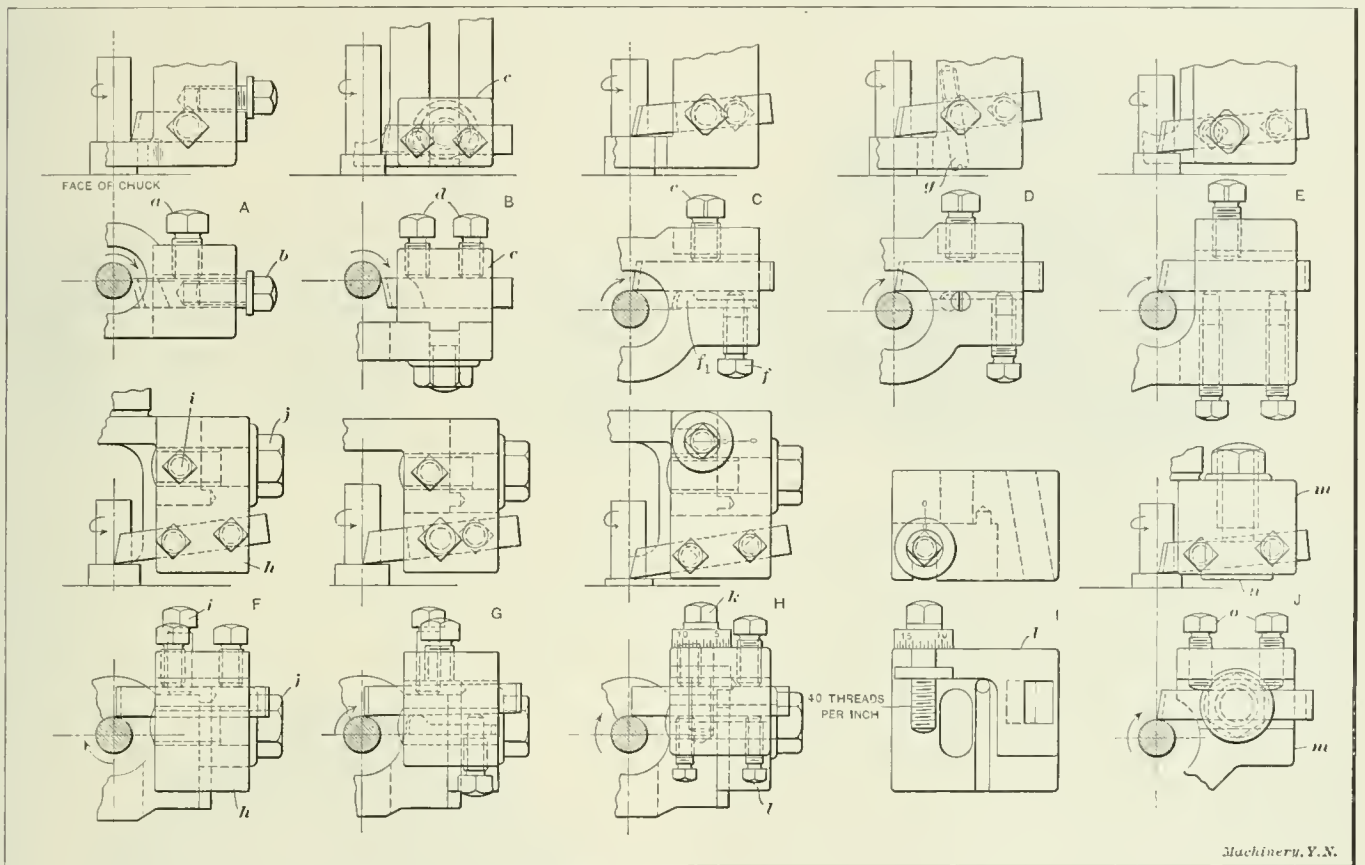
Holding and Adjusting Box-tool Cutters for Various Conditions
